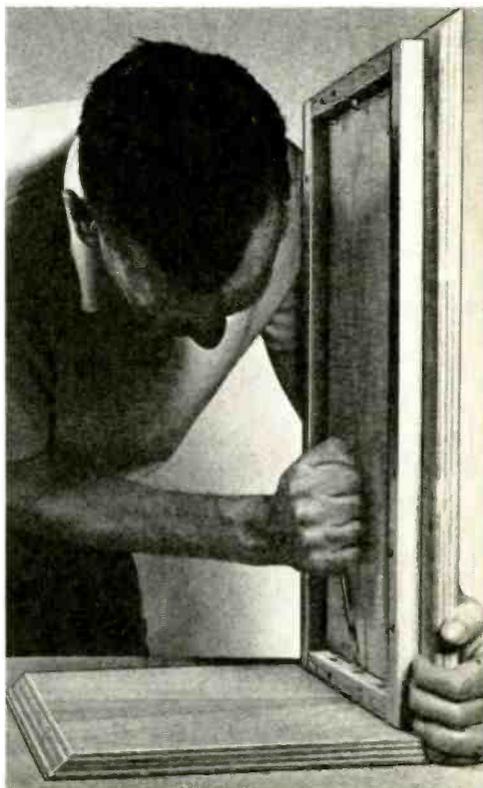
Corner blocks, drilled in two directions, must be used to anchor sides to top and bottom.
